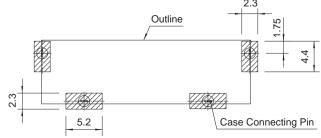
Area where Pattern Layout should not be Placed for SUT
